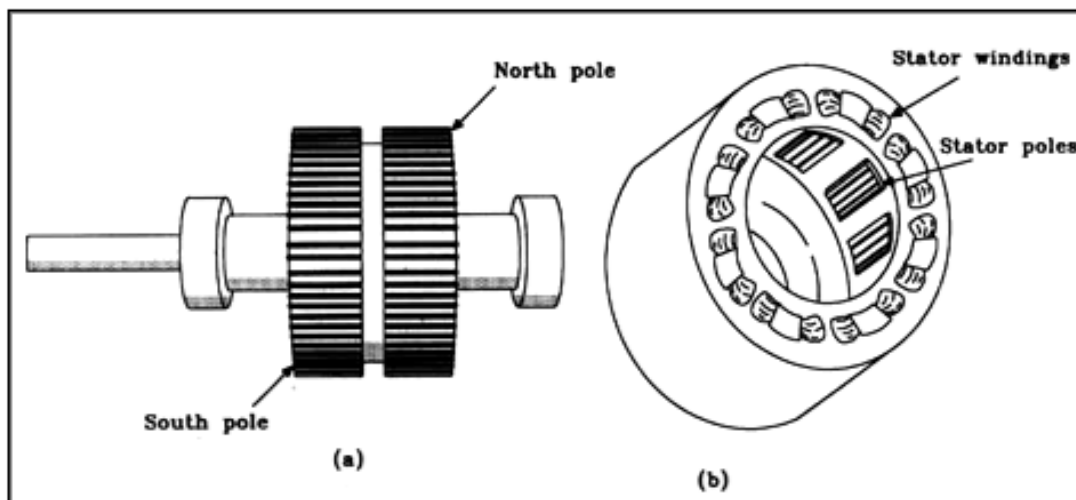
Components of a PM stepper motor: (a) Rotor; (b) stator
